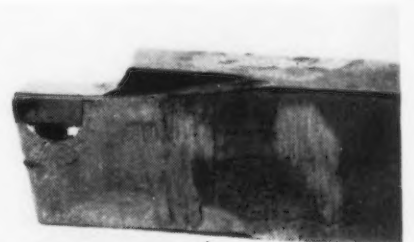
On a tool having a small nose radius, a chip breaker ground parallel to the cutting edge curls the chips so that they strike against the shank of the tool underneath the carbide blank, thereby undermining and weakening the tip.
